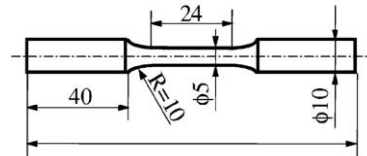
Geometry and dimensions of the ASTM E466 standard specimen used for fatigue testing
